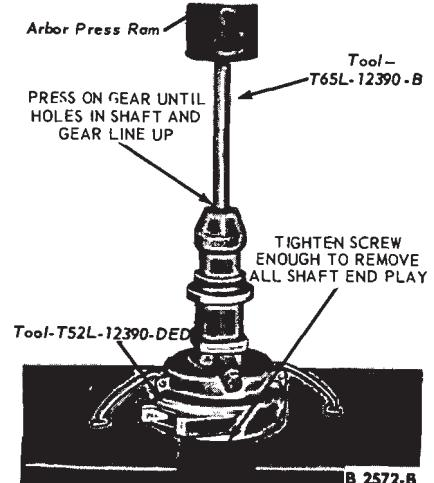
Original Shaft and Gear Installation—6-Cylinder Engine
